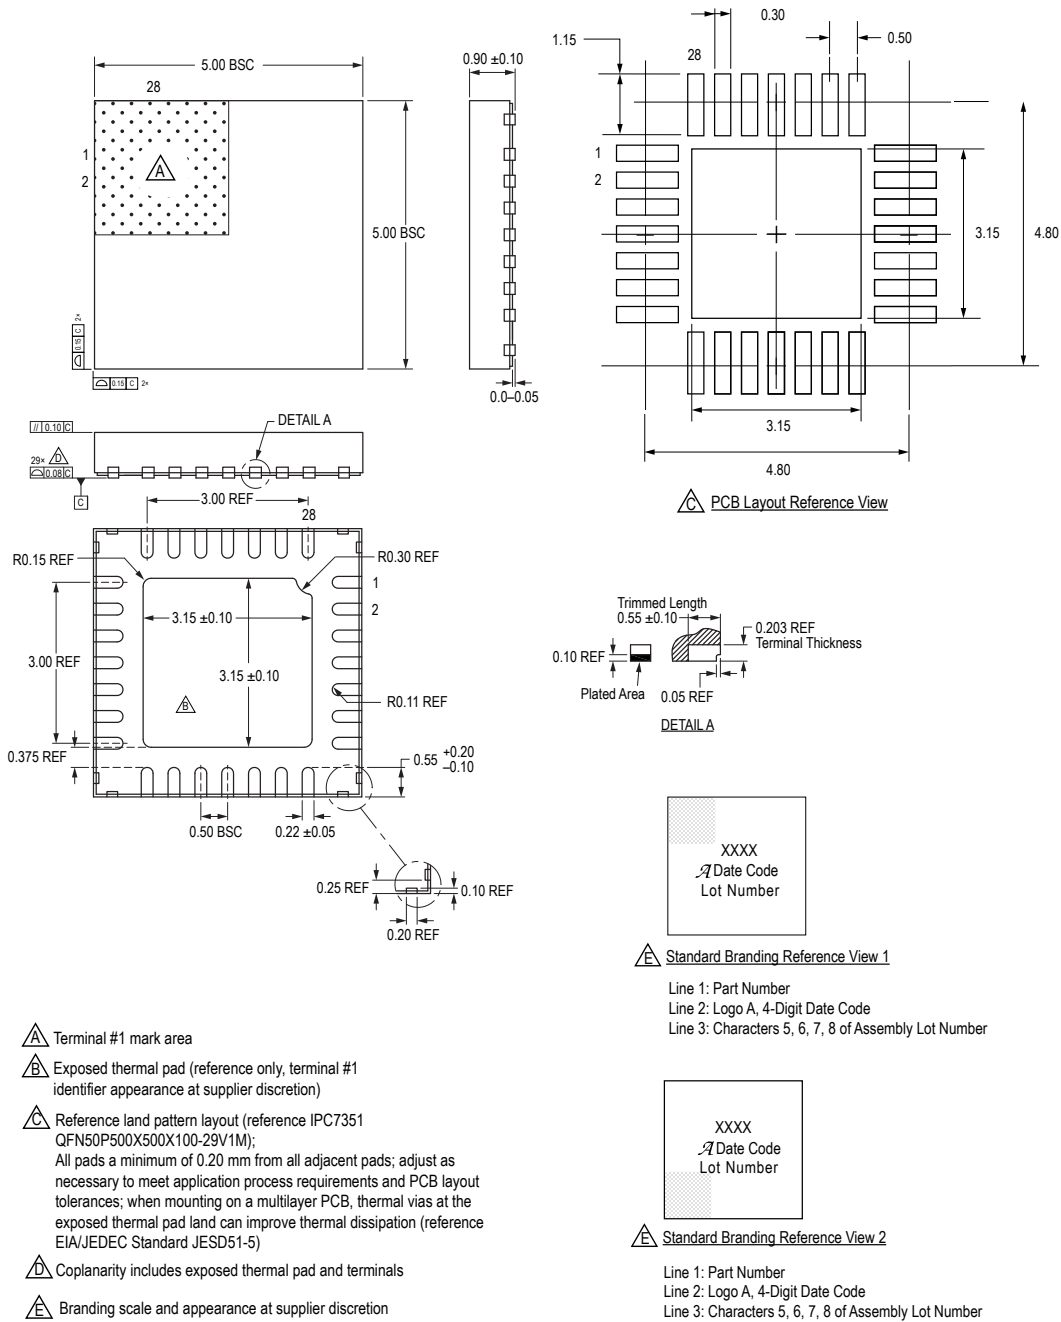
Package ET, 28-Contact QFN with Exposed Pad
